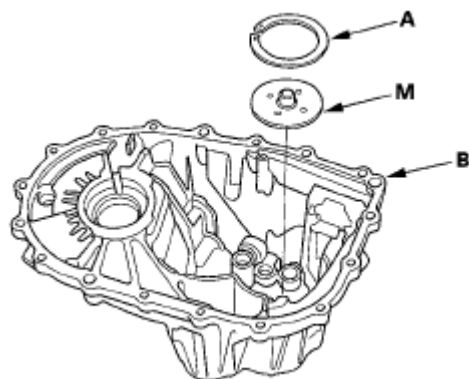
Identifying Shim, Oil Guide Plate M And Transmission Housing
